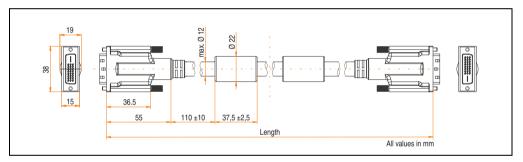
Dimensions - SDL flex cable with extender 5CASDL.0xx0-13
